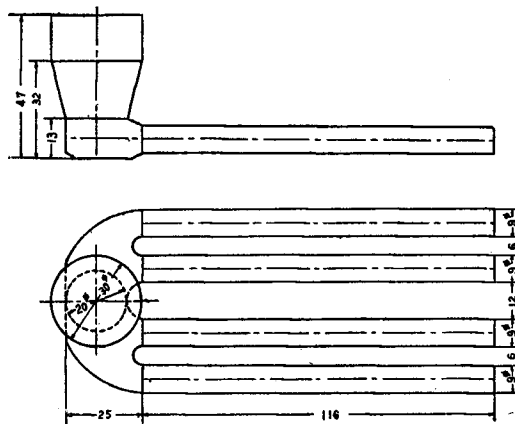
Dimensions of the specimen used in the experiment of annealing.
